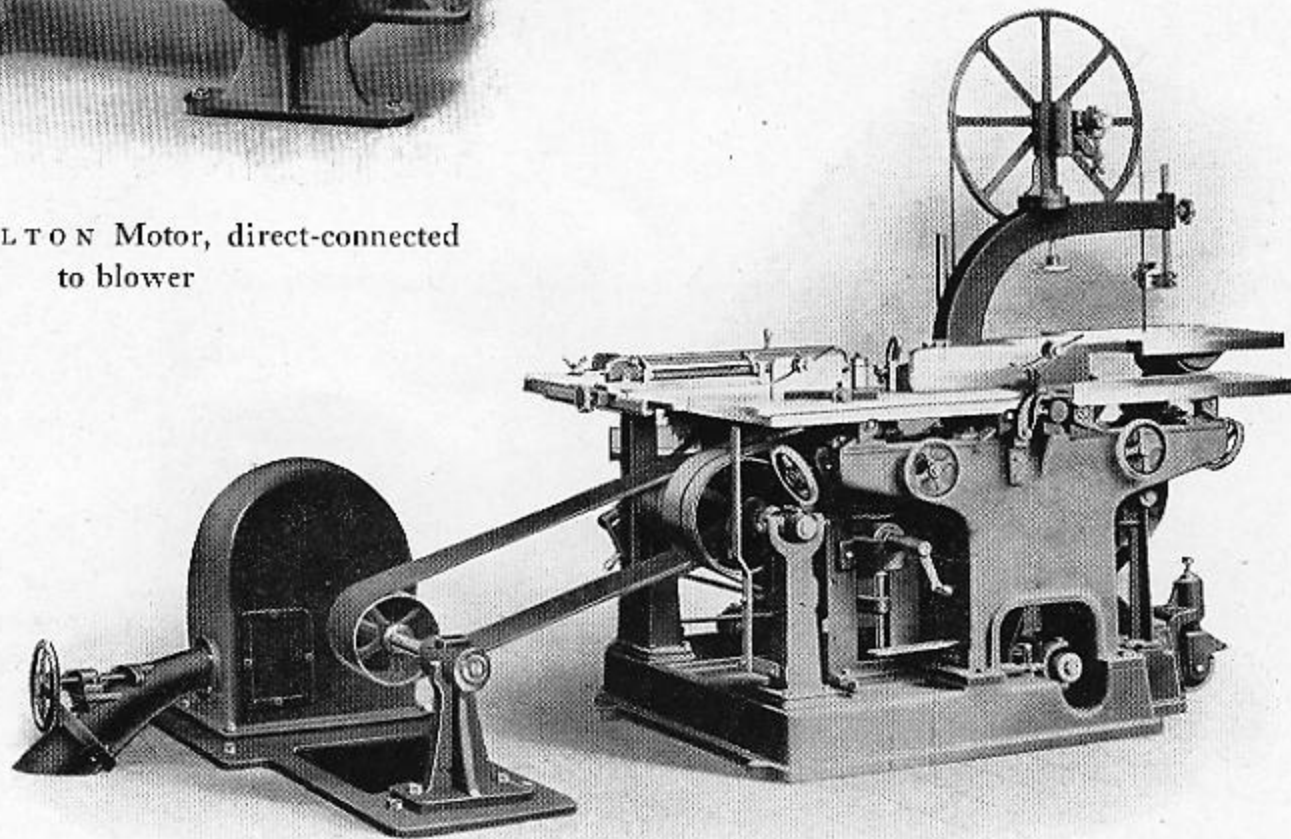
PELTON Motor belted to Universal Wood-working Machine
